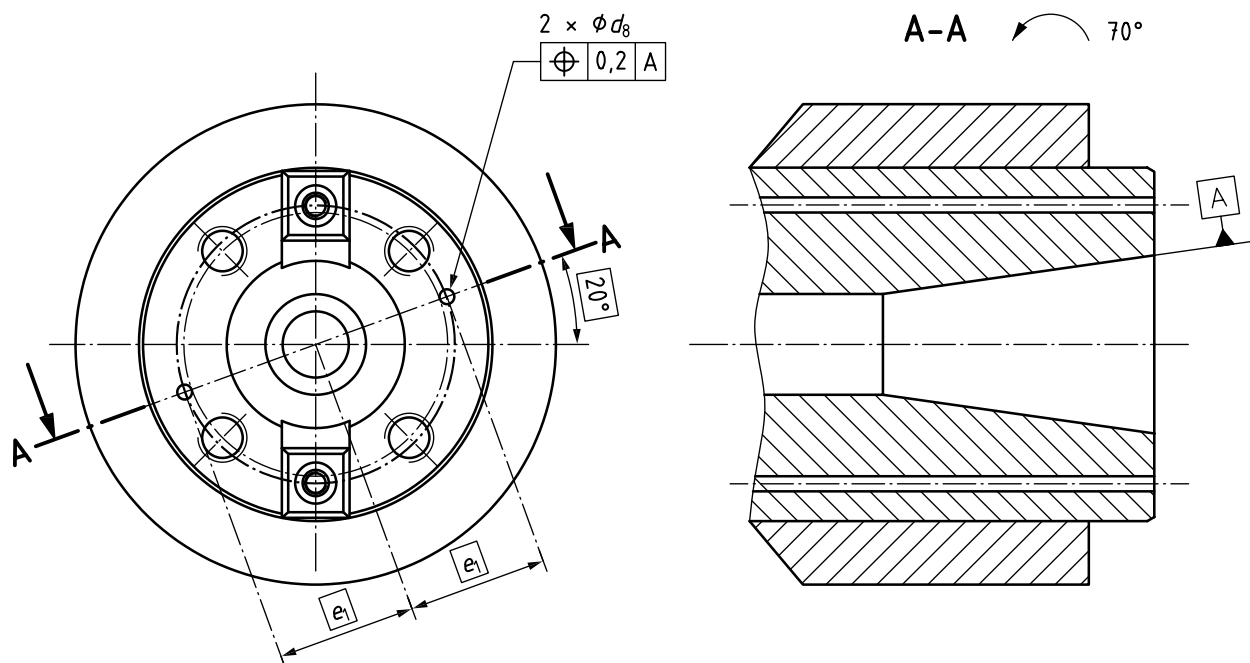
7/24 taper spindle noses of form SF for tool shanks of forms AF and UF
